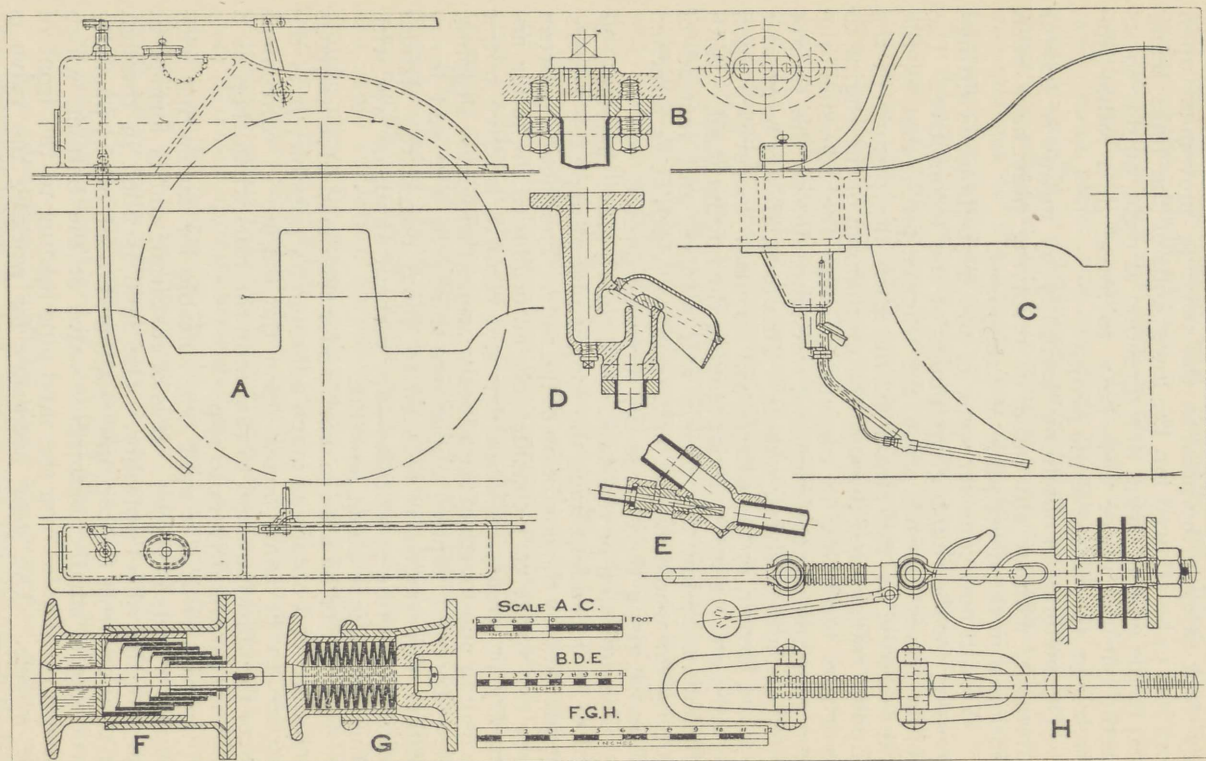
SANDING GEAR, BUFFERS, &C.
